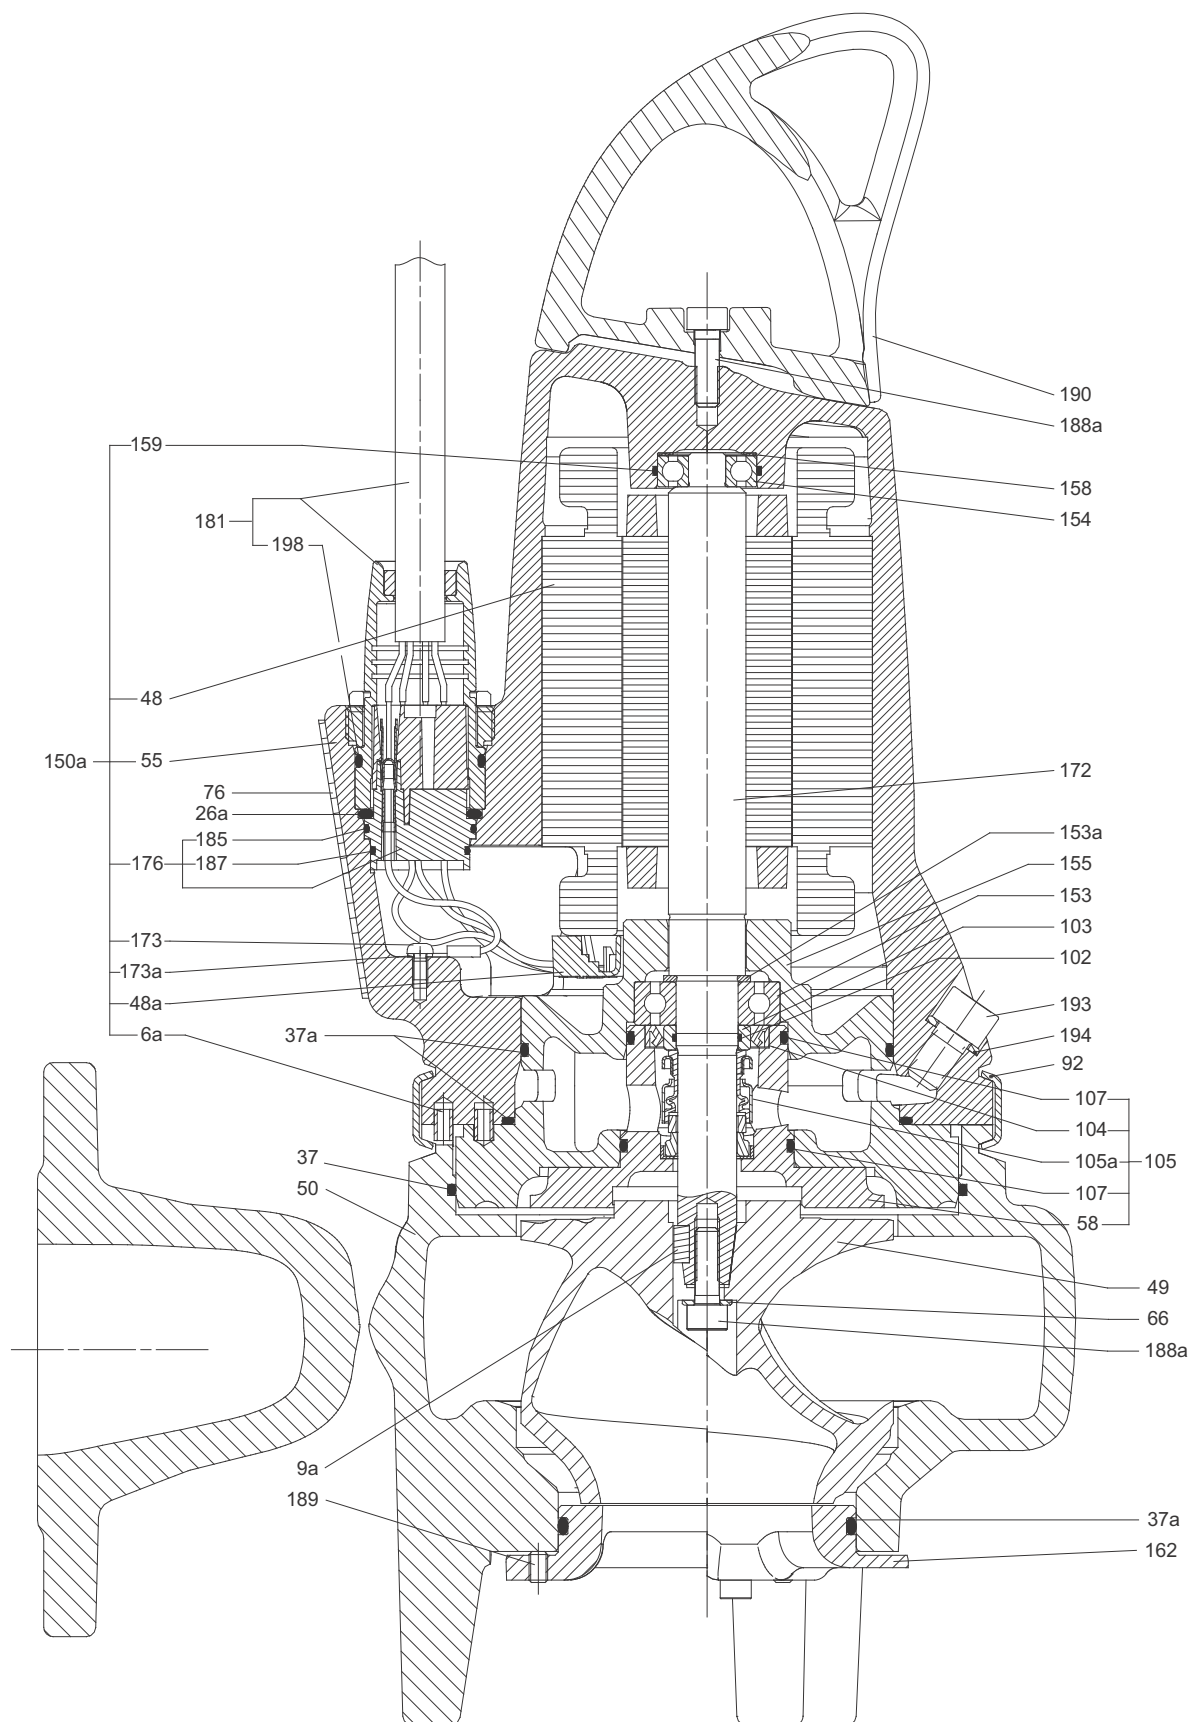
Sectional drawing, SL1.50.65.09/11/15
